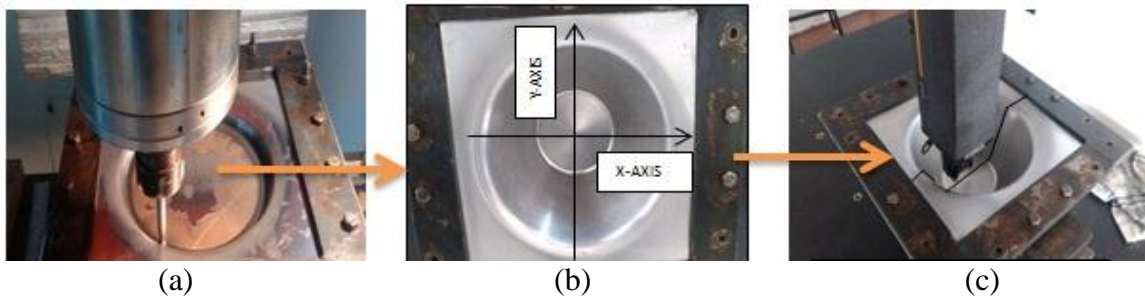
Steps followed to formed the parts (a) forming of cone, (b) formed cone in clamped position and (c) measurement of cup using CMM
